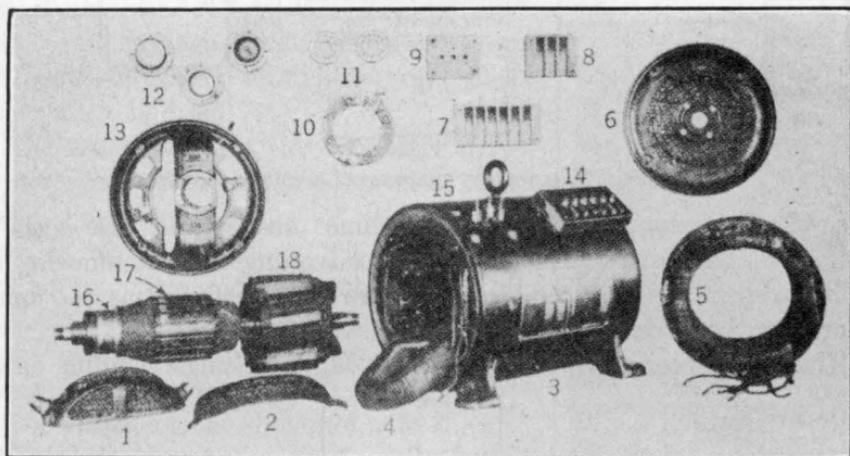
Disassembled Holtzer-Cabot 2-k.w. motor-generator.
